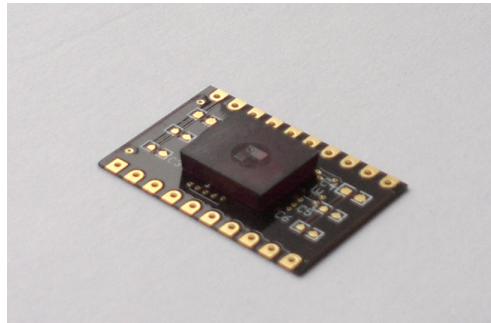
Assembled Df sensor. The assembly measures ($H \times W \times B$) (2.5-3mm \times 21mm \times 14mm). The height is dependent on the specific optical unit used.
